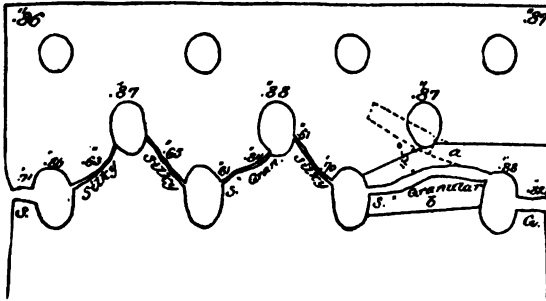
Showing Manner of Failure of a Triple-riveted Steel Plate. Figures indicate thickness of plate at that place. (*Wat. Ars. Rep.* 1887.)
